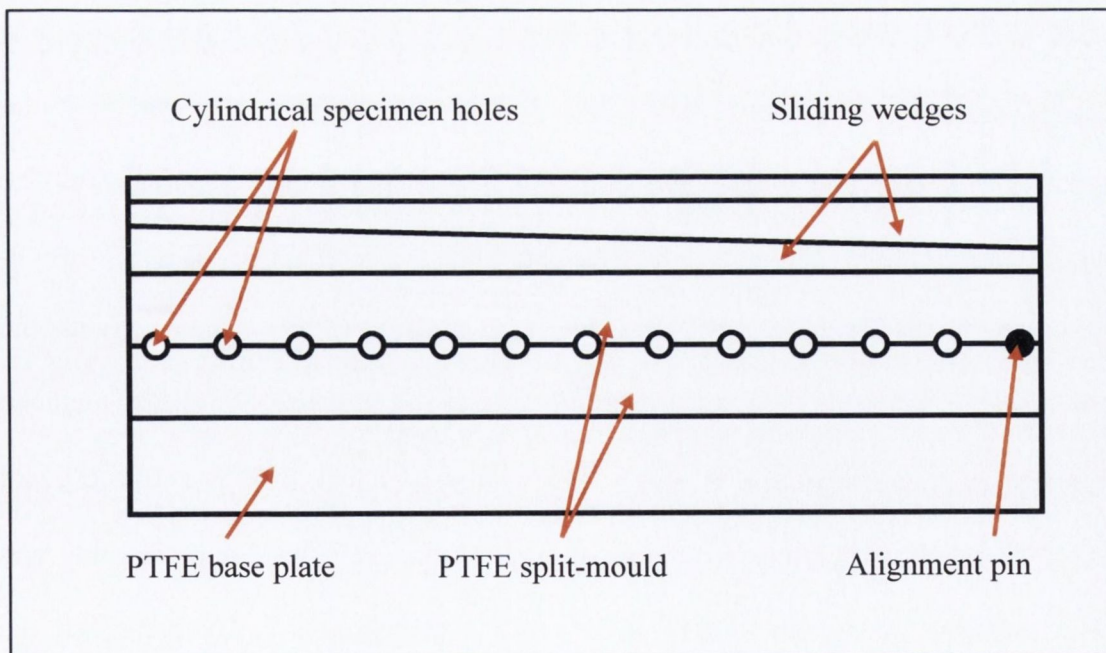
The PTFE split-mould assembly used to manufacture the cylindrical GI restorative specimens.
